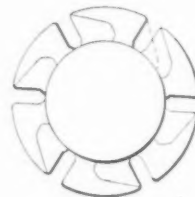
Plan of Valve Chamber Looking Toward Bottom of Head.
